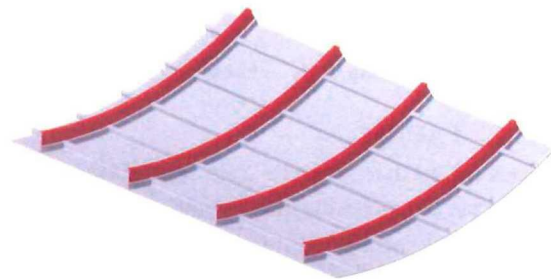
Demonstrator 2 – fuselage frames welded to an orthogrid panel.
